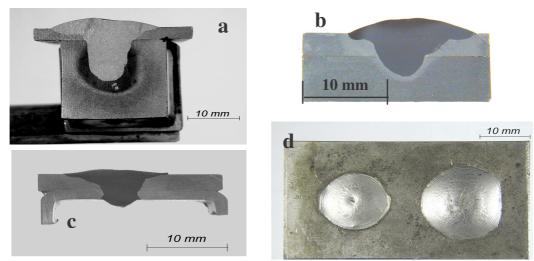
Lap joints including welds made with spot plunged arc welding with a covered electrode (a, b, c) and the shape of the final layers of two welds (d)
